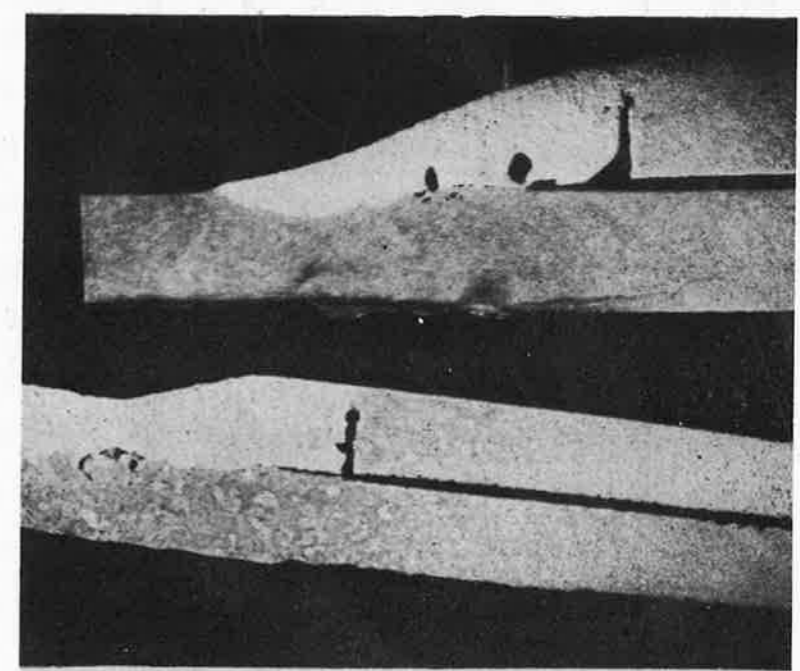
Gas Fusion Welds on Motor Mount 30203 Showing Porosity and Lack of Fusion (OS-2963). 10X Vilella's Stch
